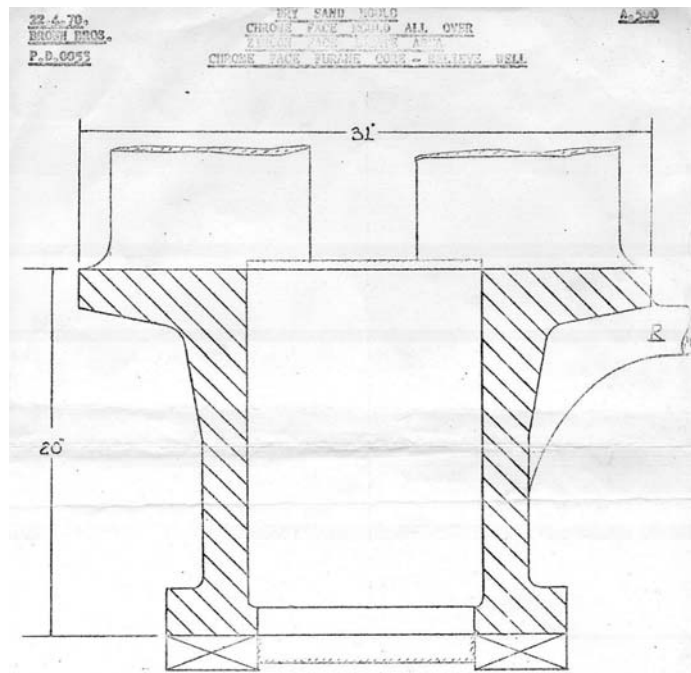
Sea-gland Engineering Drawing Section Slice
